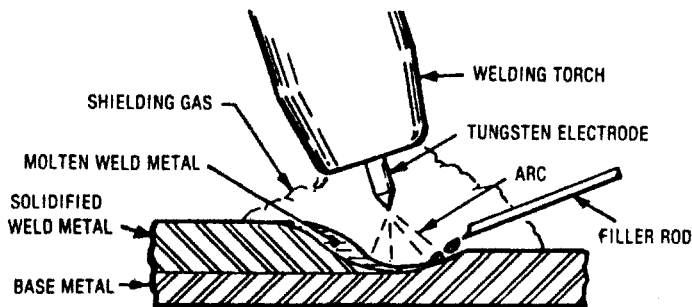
Tungsten inert-gas (TIG) shielded arc welding. In this process the arc is established between the workpiece and a nonconsumable tungsten electrode. A filler rod is fed into the weld separately by the welder. Shielding gas such as argon or helium blankets the welding area. This process is used on special alloys and on more critical work on lighter sections than SMA. Airborne contaminants include relatively low metal fume concentrations from the variety of alloys, steels, and nonferrous materials welded with this technique; significant ozone concentrations may occur in poorly ventilated workstations.
